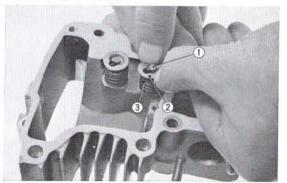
(1) Valve (3) Valve spring (2) Valve spring retainer
